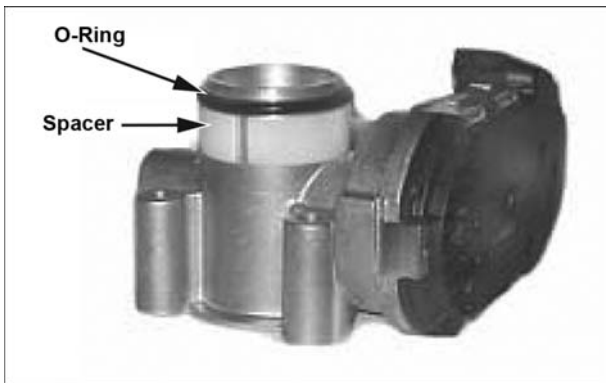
O-Ring and Spacer Within Mixer Adapter Assembly
